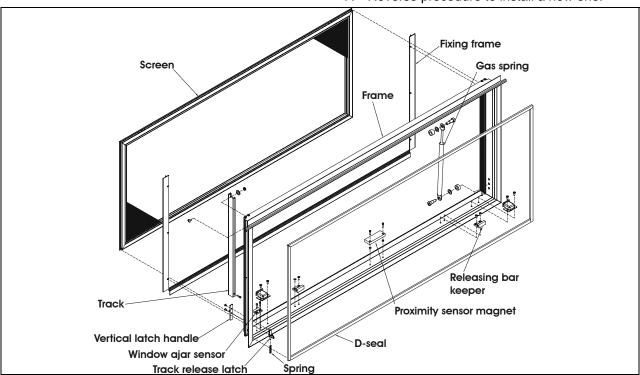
ELECTRIC AWNING WINDOW EXPLODED VIEW (FRAME)
